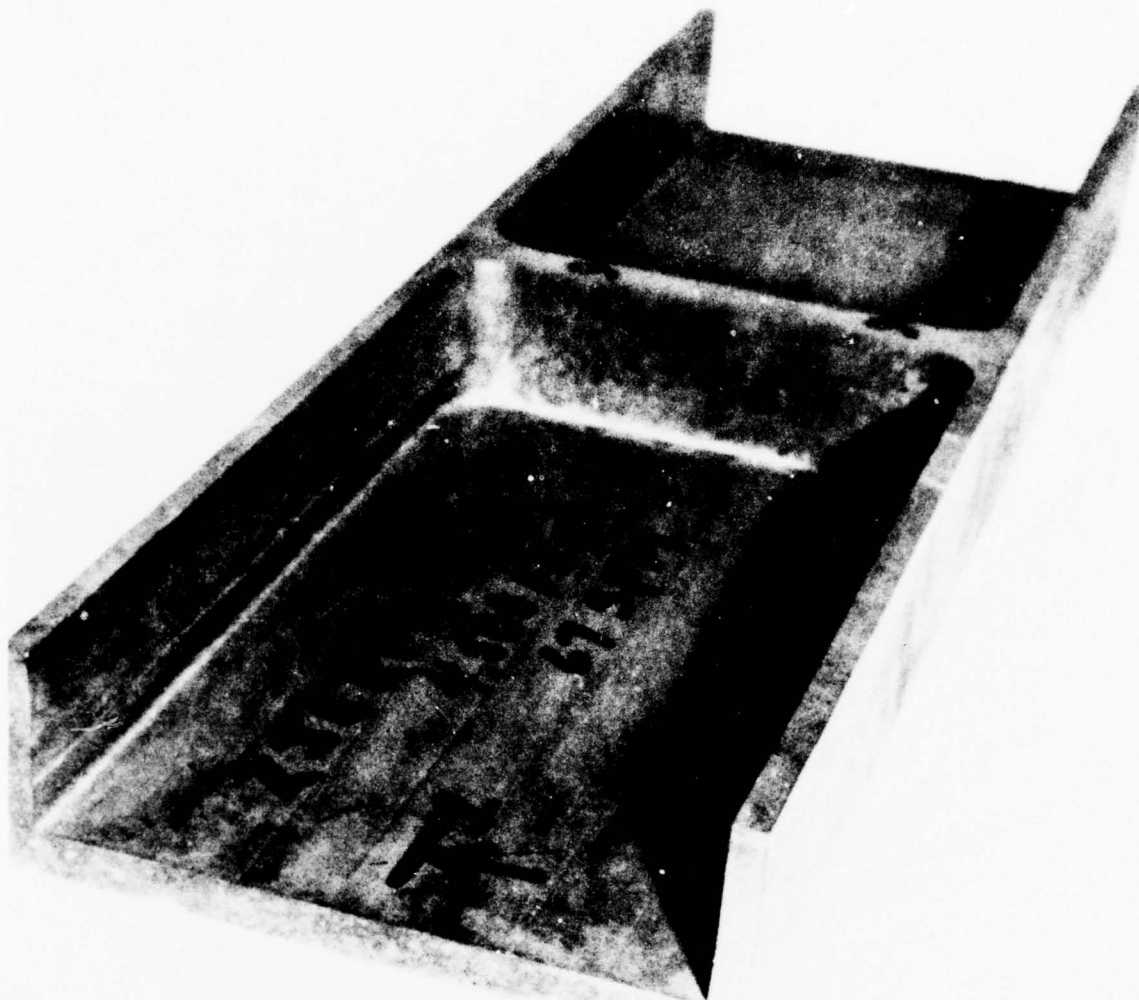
Typical Phase III open-ended, pocketed part after rough machining and final heat treating.
